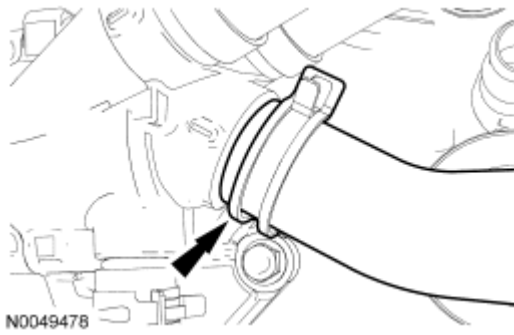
Disconnecting Coolant Hose From Thermostat Housing
